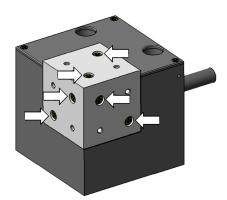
P-616.3C. Position of the 6 fastening screws for the XYZ mounting platform
